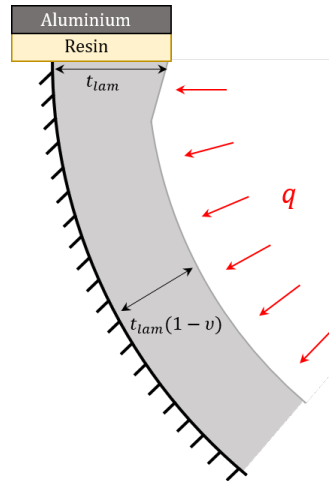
Detail of the clamping set-up using resin to hold the plies and an aluminium strip to withstand pressure. The thickness gradient caused by the clamping results in the bag pressure imparting a small tensile load on the plies, aiding mobility.
